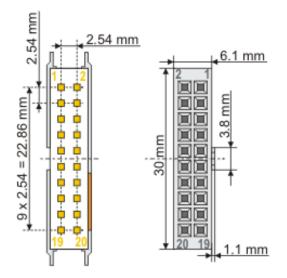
Dimensions of the 20-pin contact strip in the terminal and the matching spring contact strip
